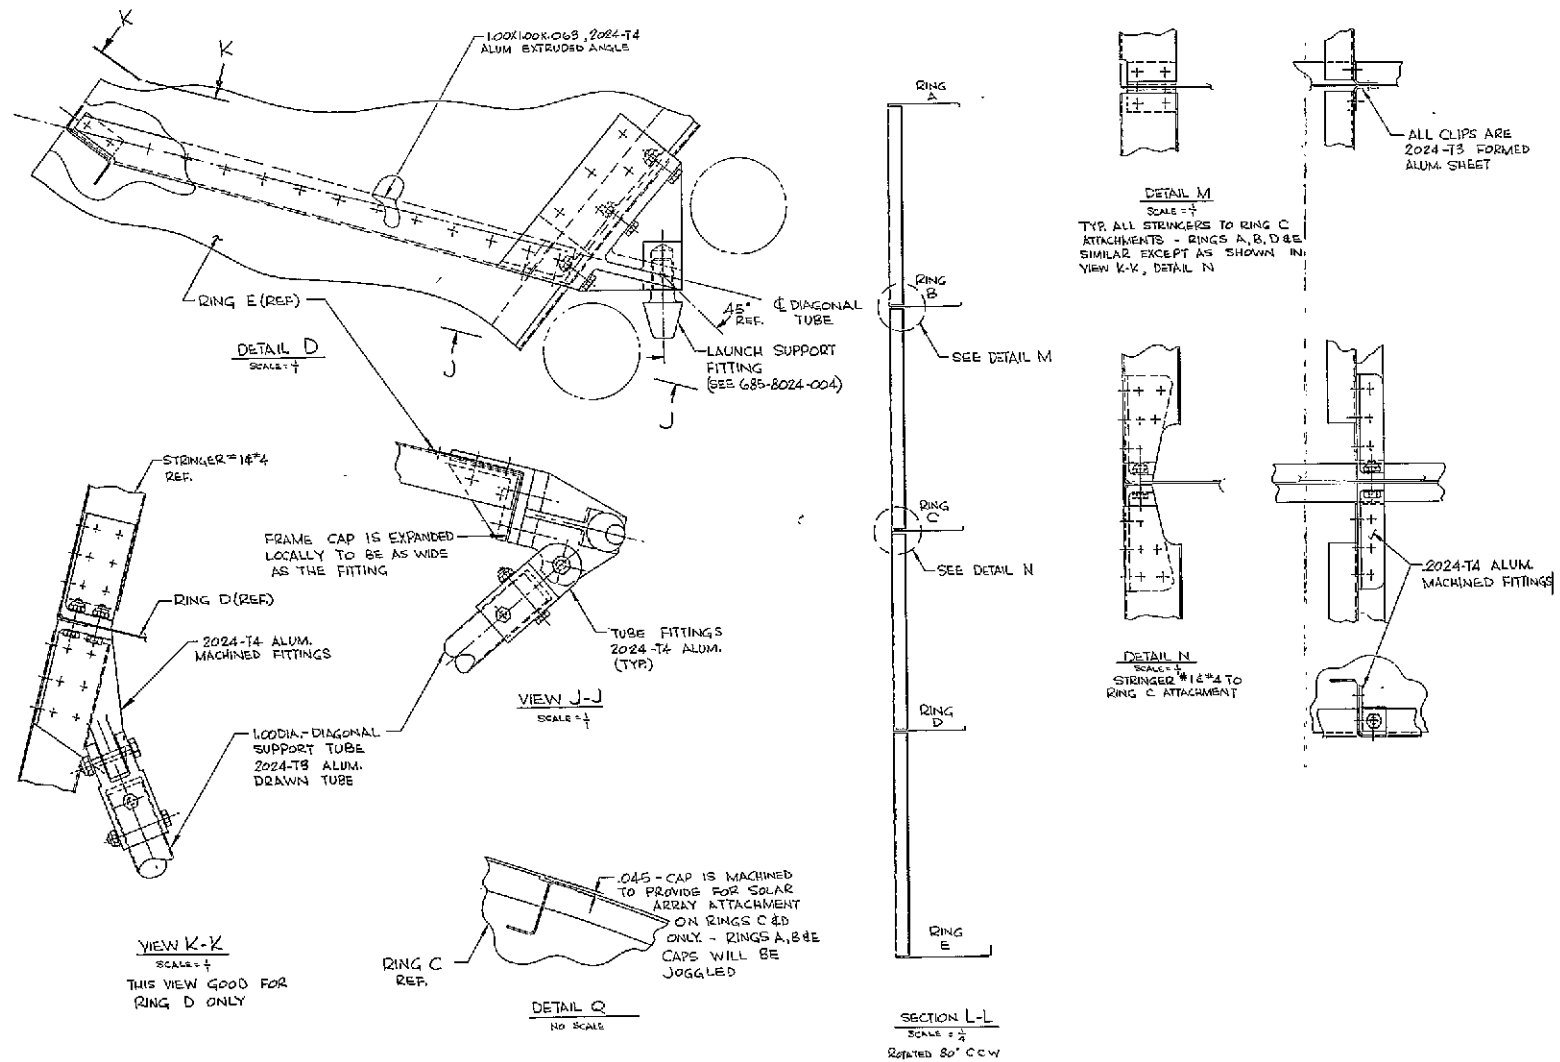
Cylindrical Solar Panel (Sheet 3 of 3)
